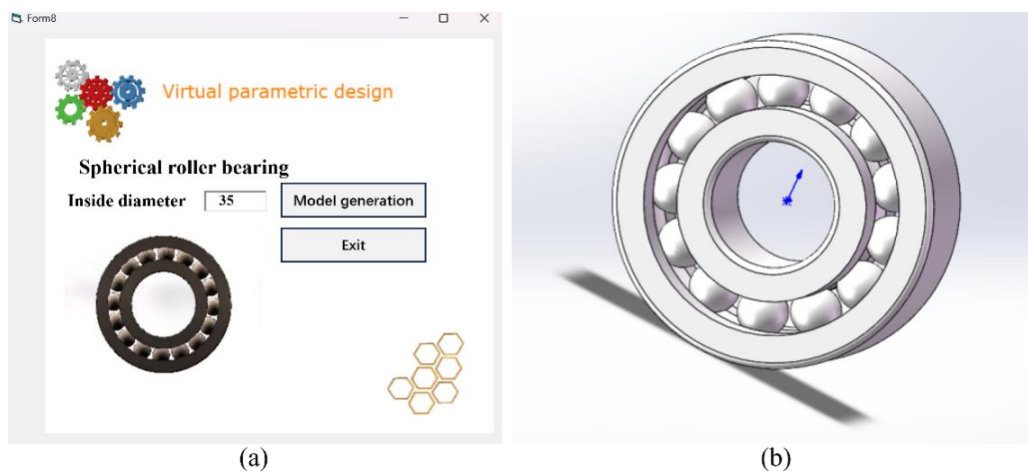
(a) The design interface of bearing; (b) the three-dimensional model of bearing.
